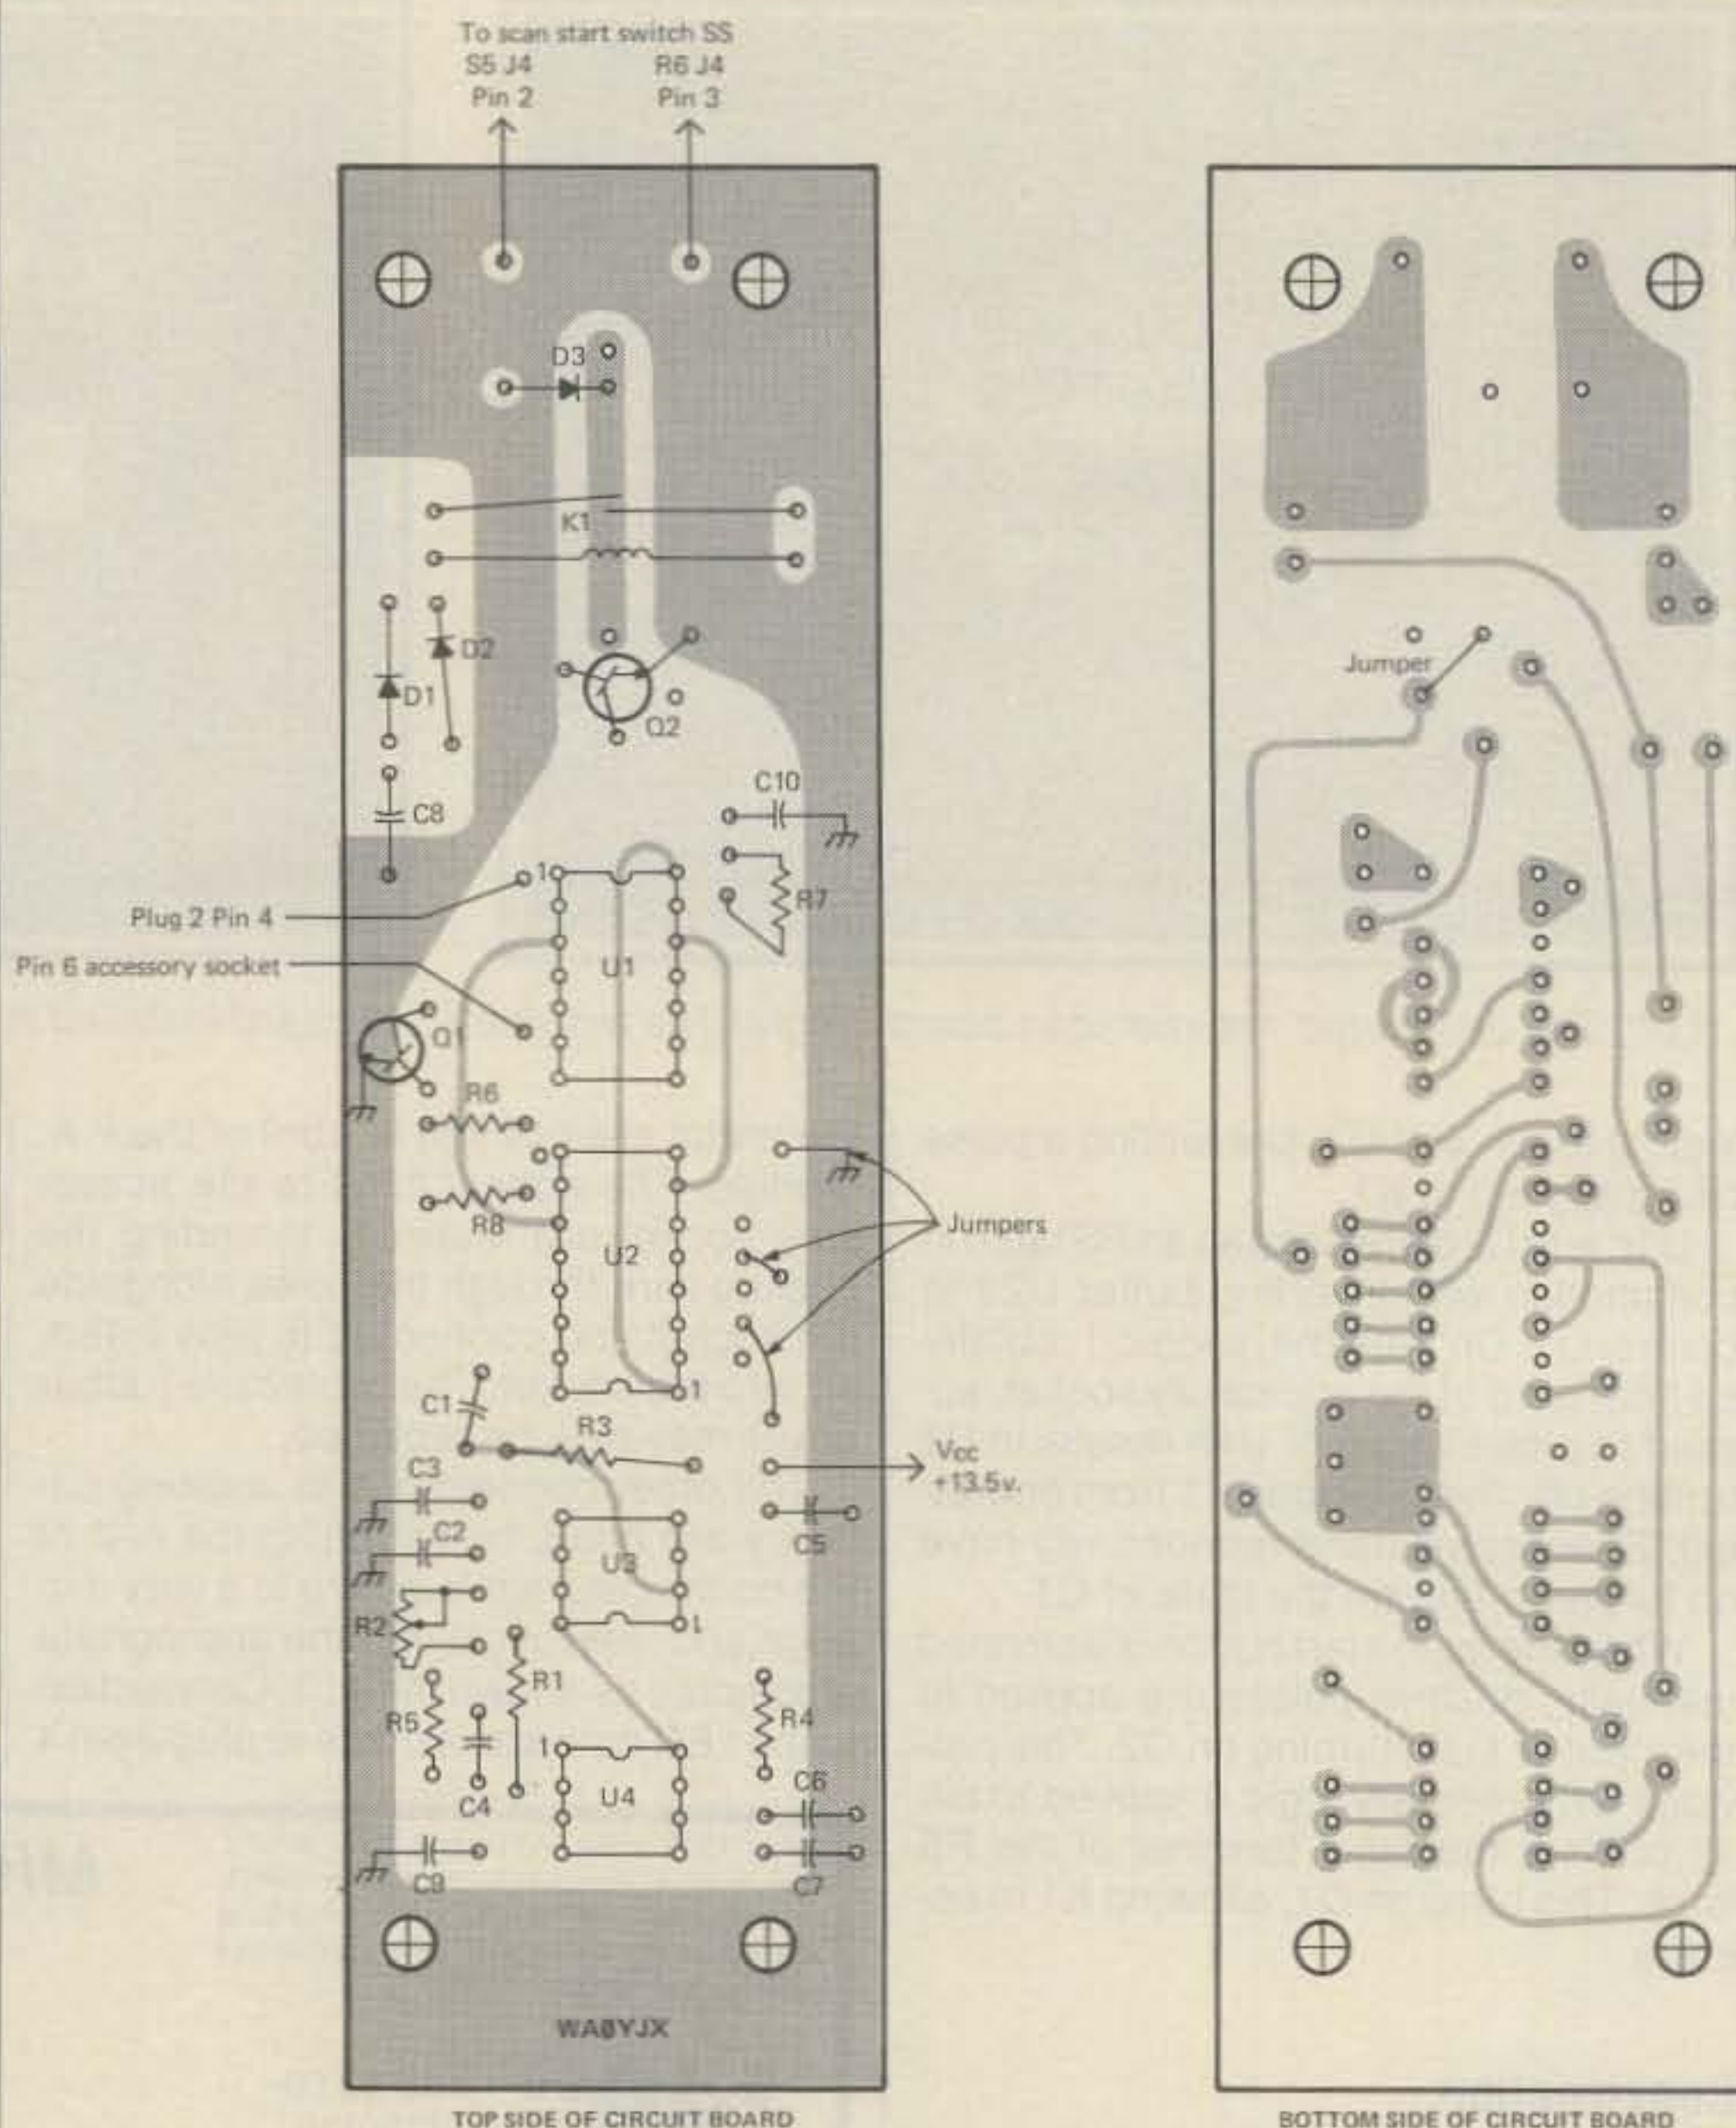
PC board layout and parts placement for the resume-scan modification.
